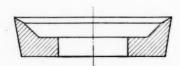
EXPERIMENTAL ROTARY LATHE TOOL
